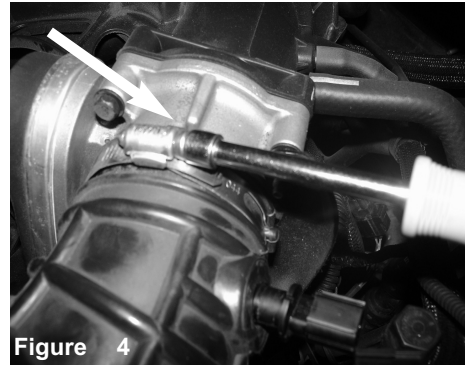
Loosen the clamp on the throttle body using 8mm nut driver.
